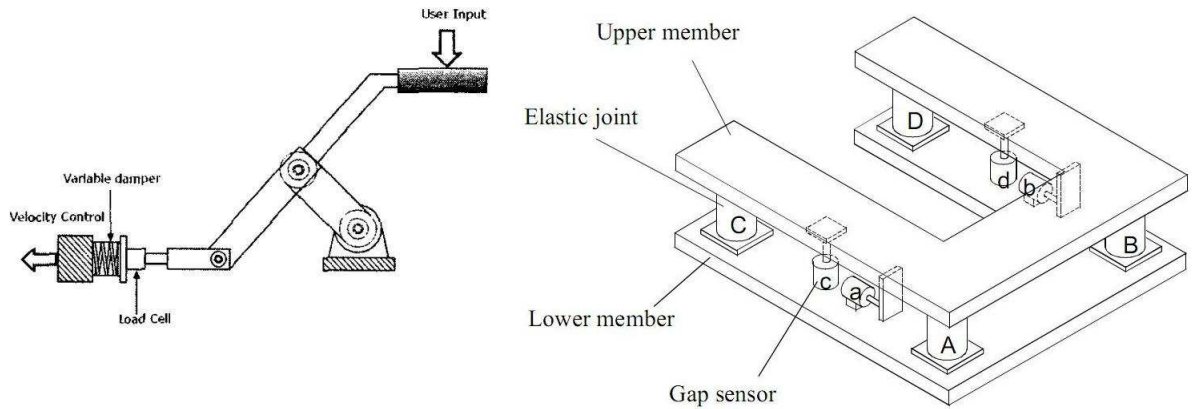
Grip lever mechanism [26] (left) and U-shaped supporting arm [8].
